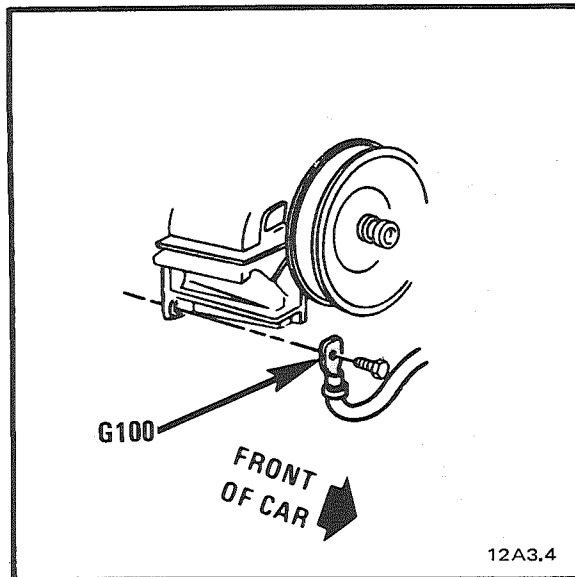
Figure B - Lower LH Front Of VIN F Engine (VIN 8 Similar)
